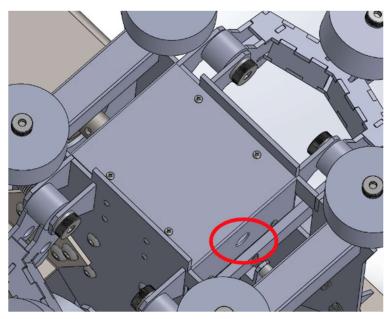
A CAD picture of the complete assembly of the sheet metal box and cover.
